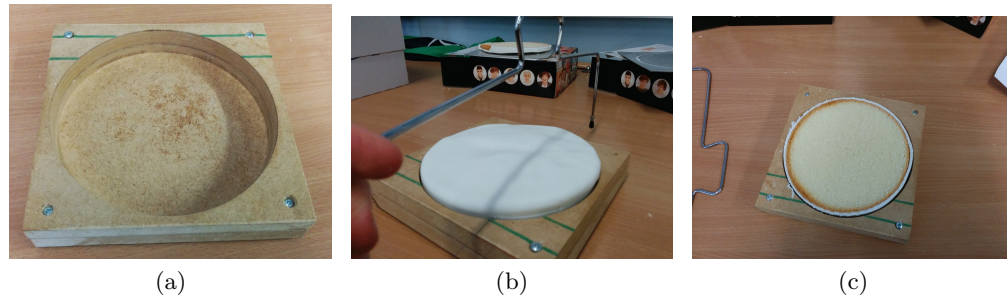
The fixture used to ensure consistent sponge cut and location. (a) The empty fixture. (b) A sponge being cut. (c) A cut sponge.
